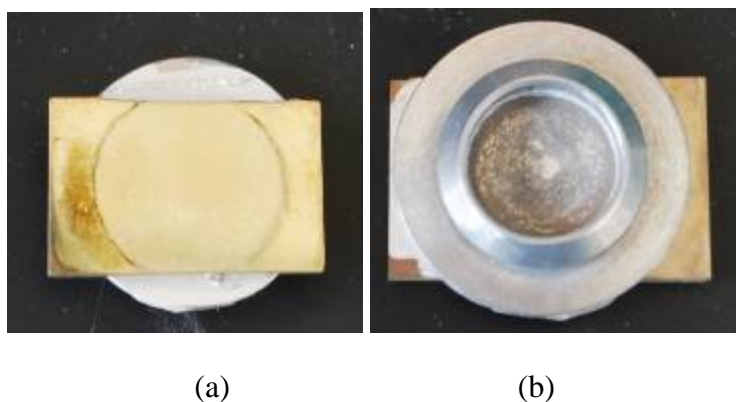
Example of Mounted Single-Pass Sample (a) top view (b)bottom view.
